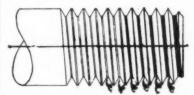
How chips adhere to thread when one chaser does not track properly.
